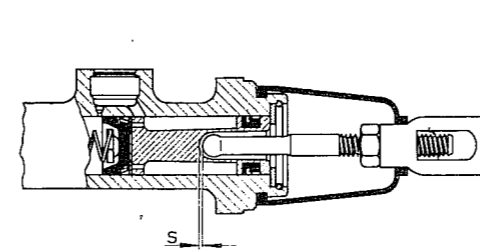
Push rod to master cylinder clearance. S = 1.0mm. (0.04 in.).
